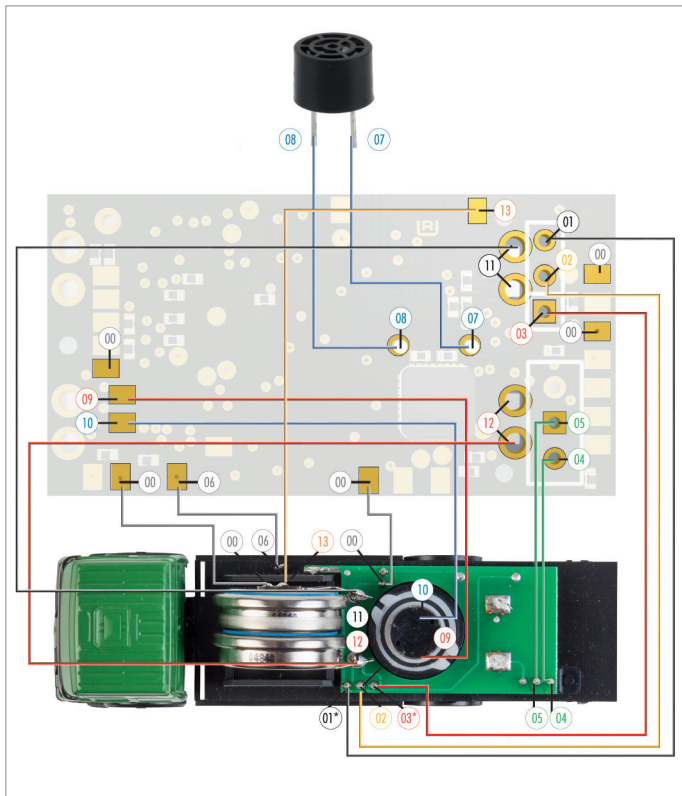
Connection diagram, type lorry model with universal PCB, soldered batteries
